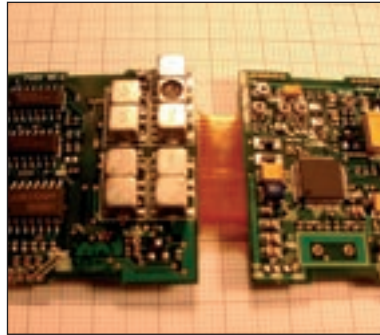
A flex-rigid board with components assembled (left) and a flex-rigid board after assembly (right)
